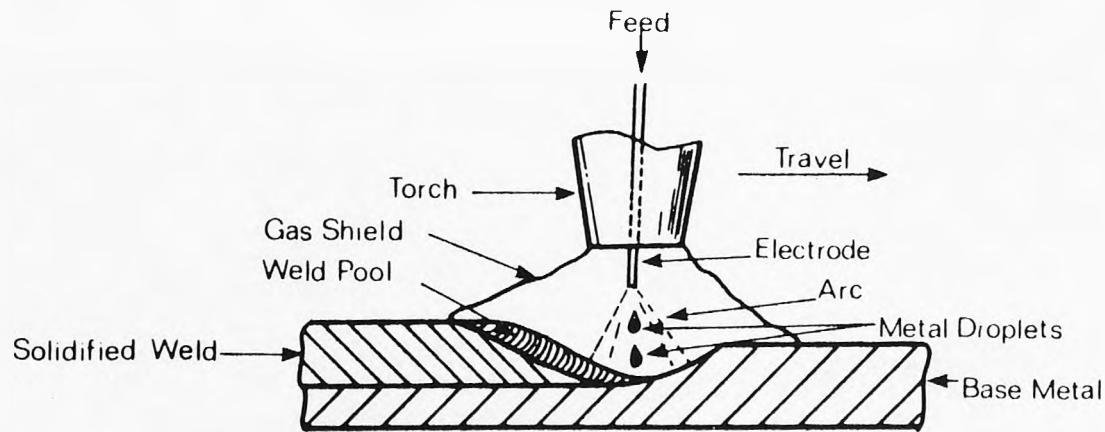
WELDING OF 'THICKER' METAL
